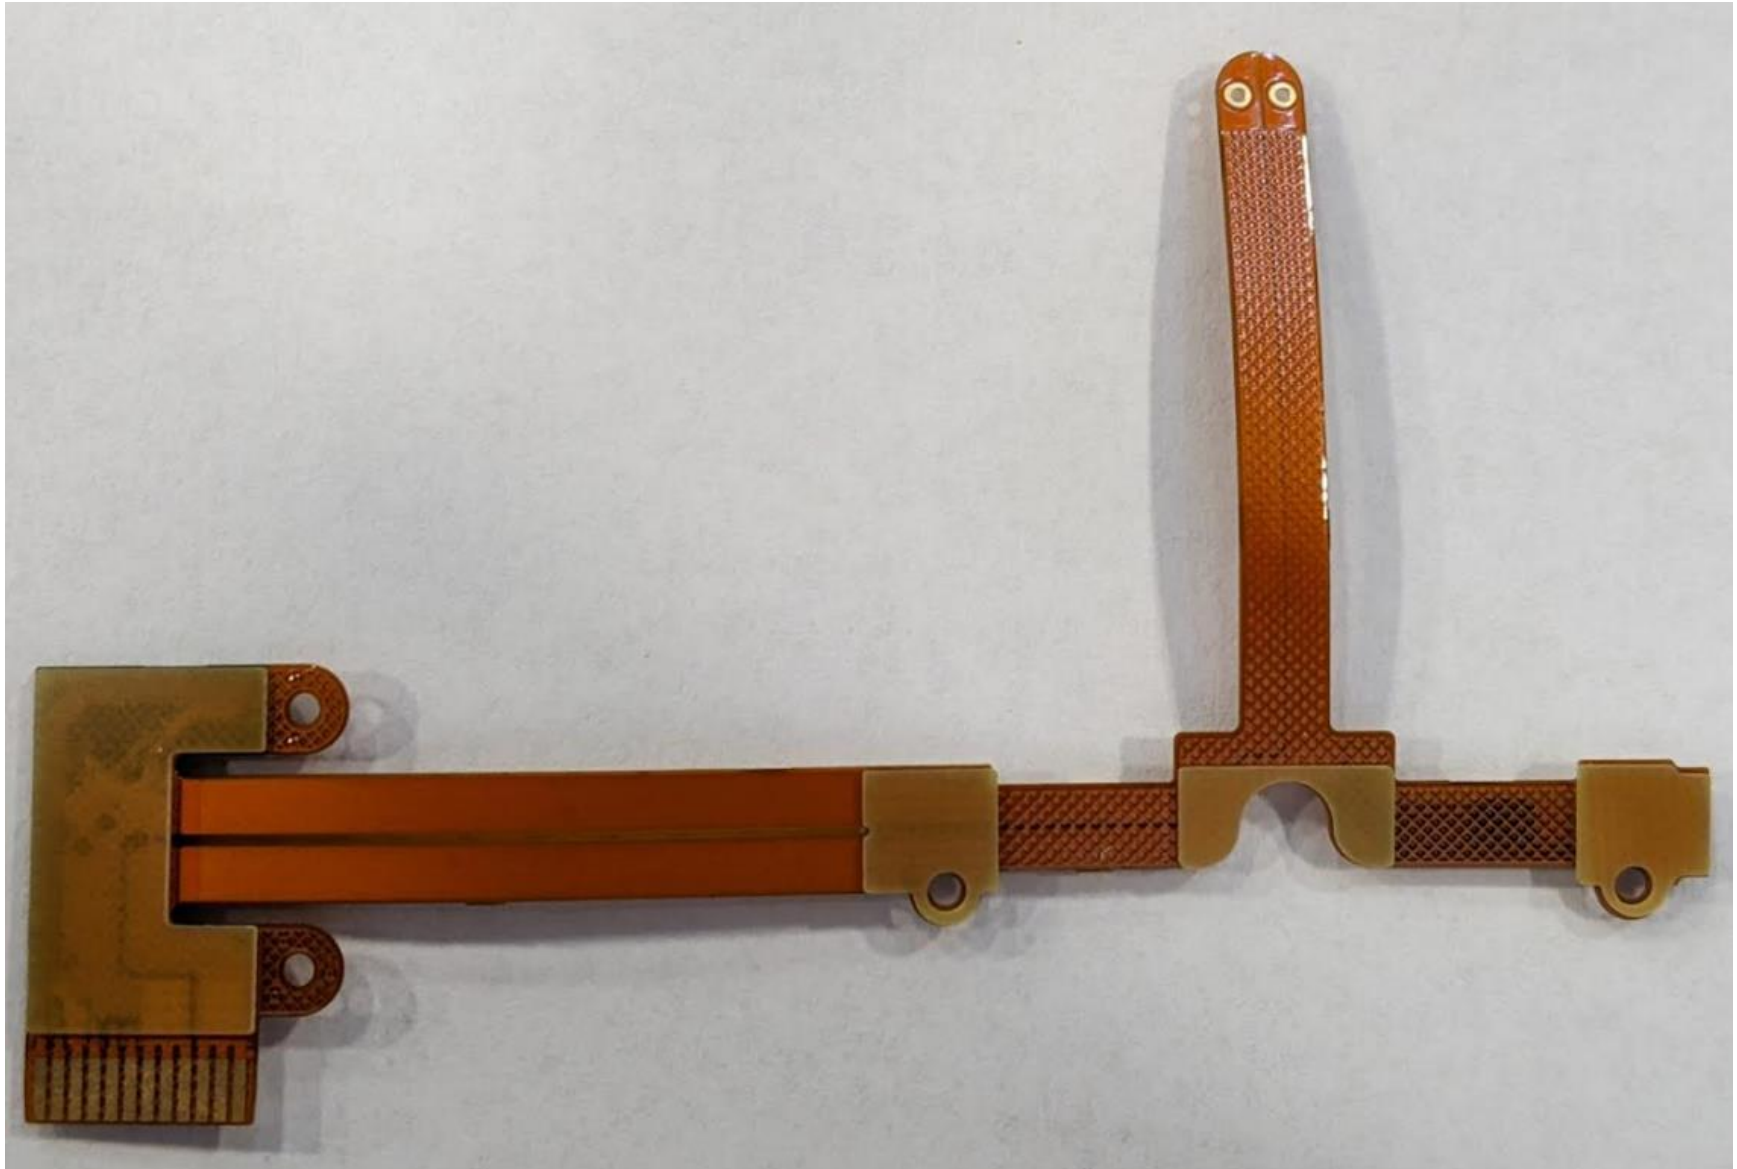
GF-PCA-00173- Flex Head PCBA- Bottom Side
